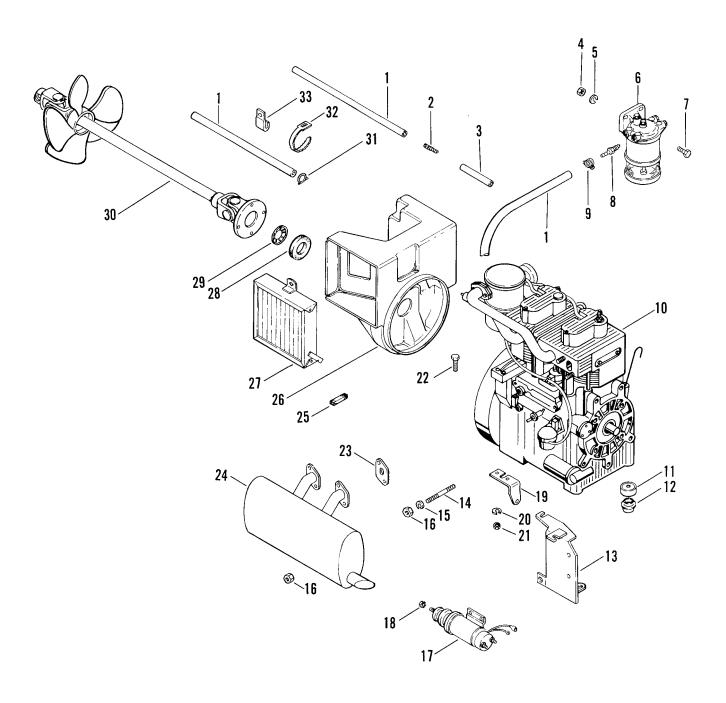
Engine and Drive Shaft - Diesel Exploded View
